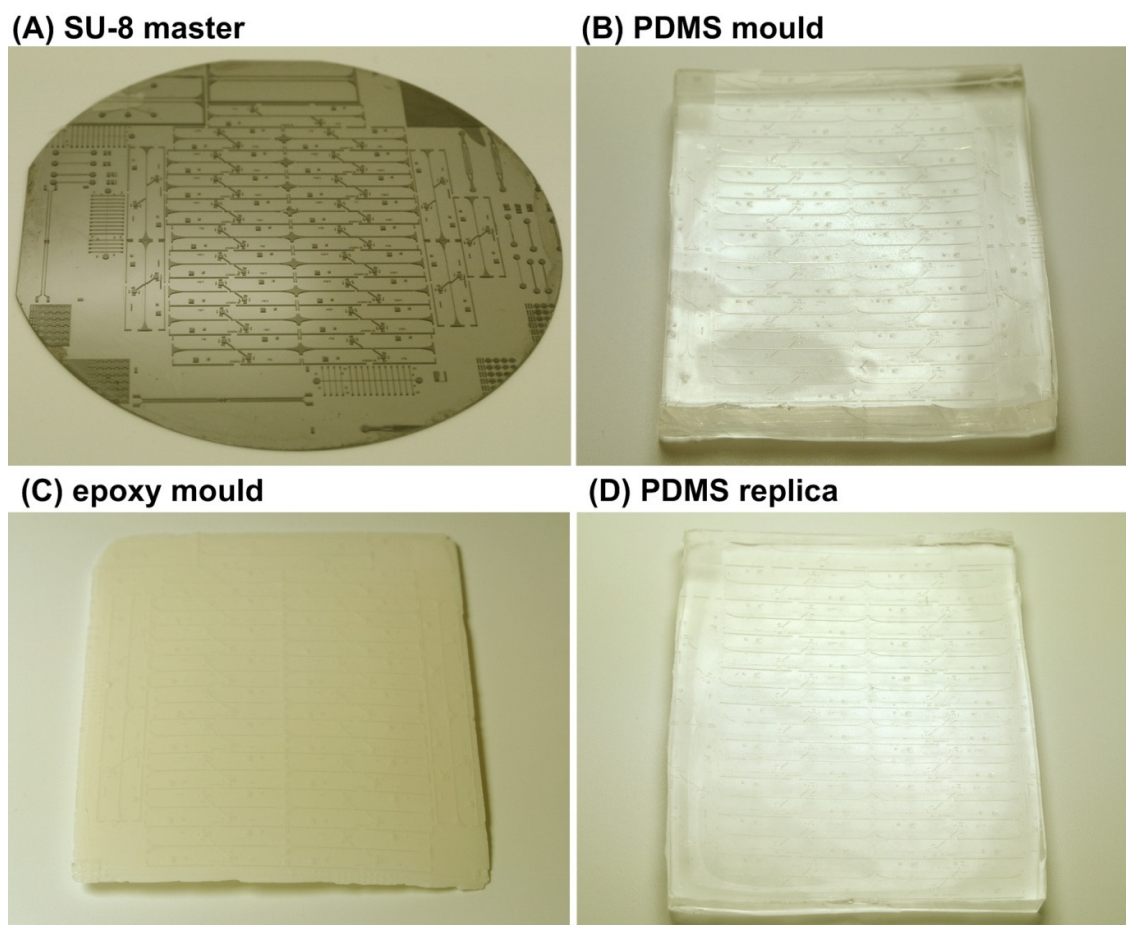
The process of the chip microfabrication: the moulding process starts with the fabrication of the SU-8 master mould (A), then instead of casting PDMS repeatedly from this mould, PDMS is casted once (B) and used as mould for the patterning of an epoxy mould (C), which can then be used to produce many PDMS replicas (D) without suffering delamination problems.
